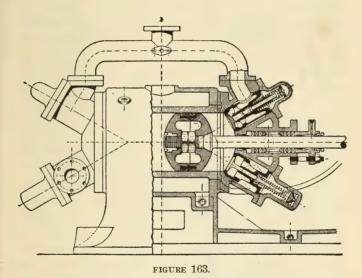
shows a sectional view of the compressor cylinder, piston, and valves. It will be observed that the piston and heads are spherical and of the same radius. The valve discs conform absolutely to this radius, and when the valves are seated these discs are exactly flush with the heads.
